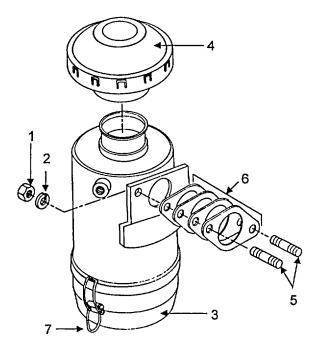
ENGINE OIL BATH AIR CLEANER FILTER
